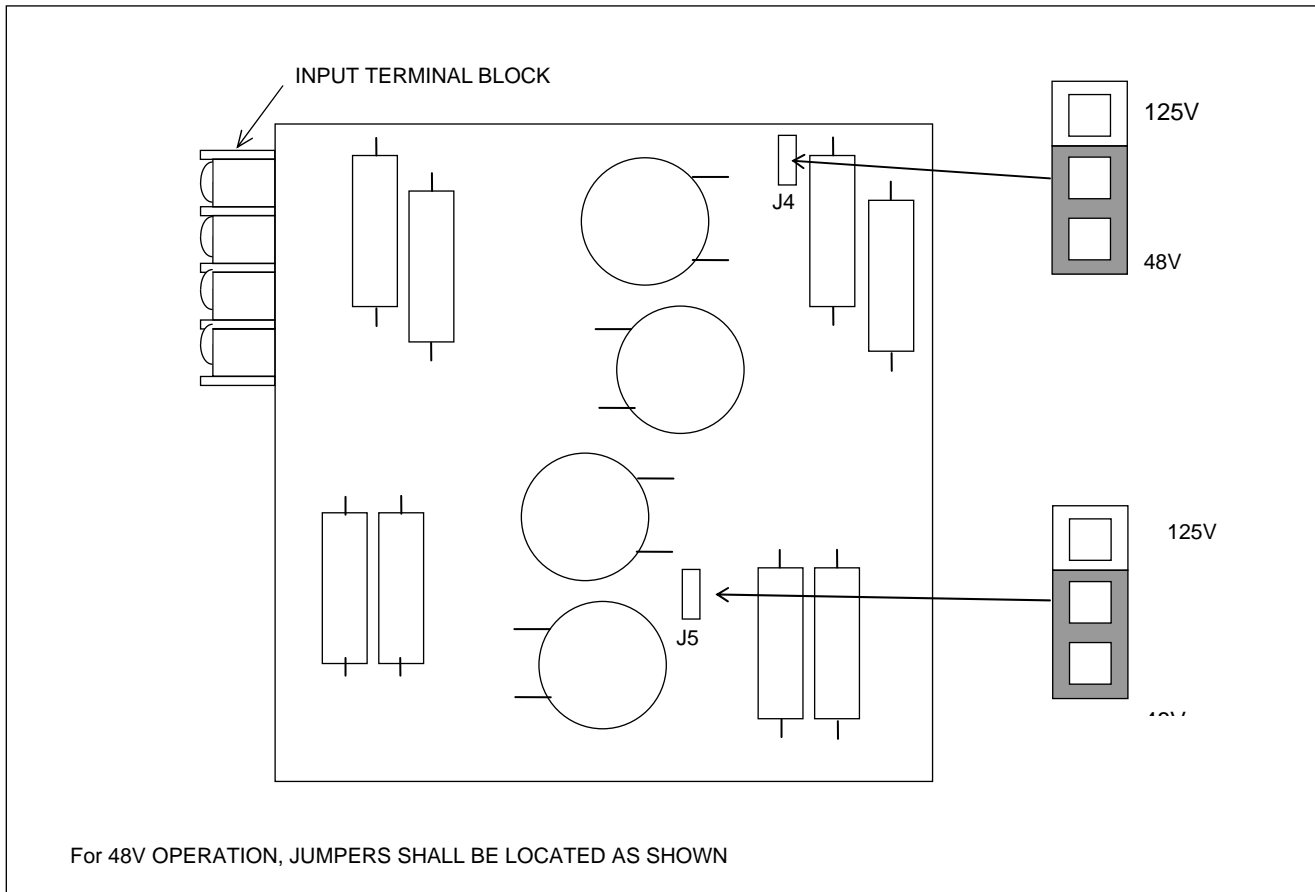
Location and use of voltage control jumpers on a typical I/O adapter module input board
